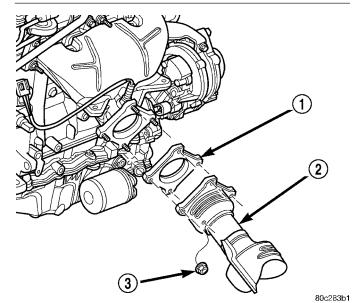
Converter to Exhaust Manifold Connection - 2.4L
